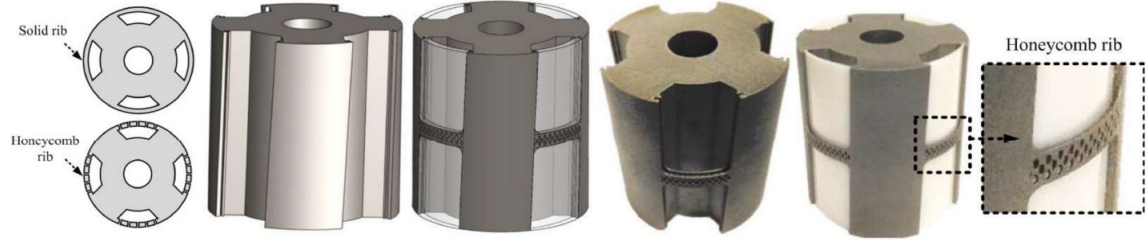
3D Printed Skewed Rotor with Honeycomb Structure Cores for Reduced Torque Ripples [27]
